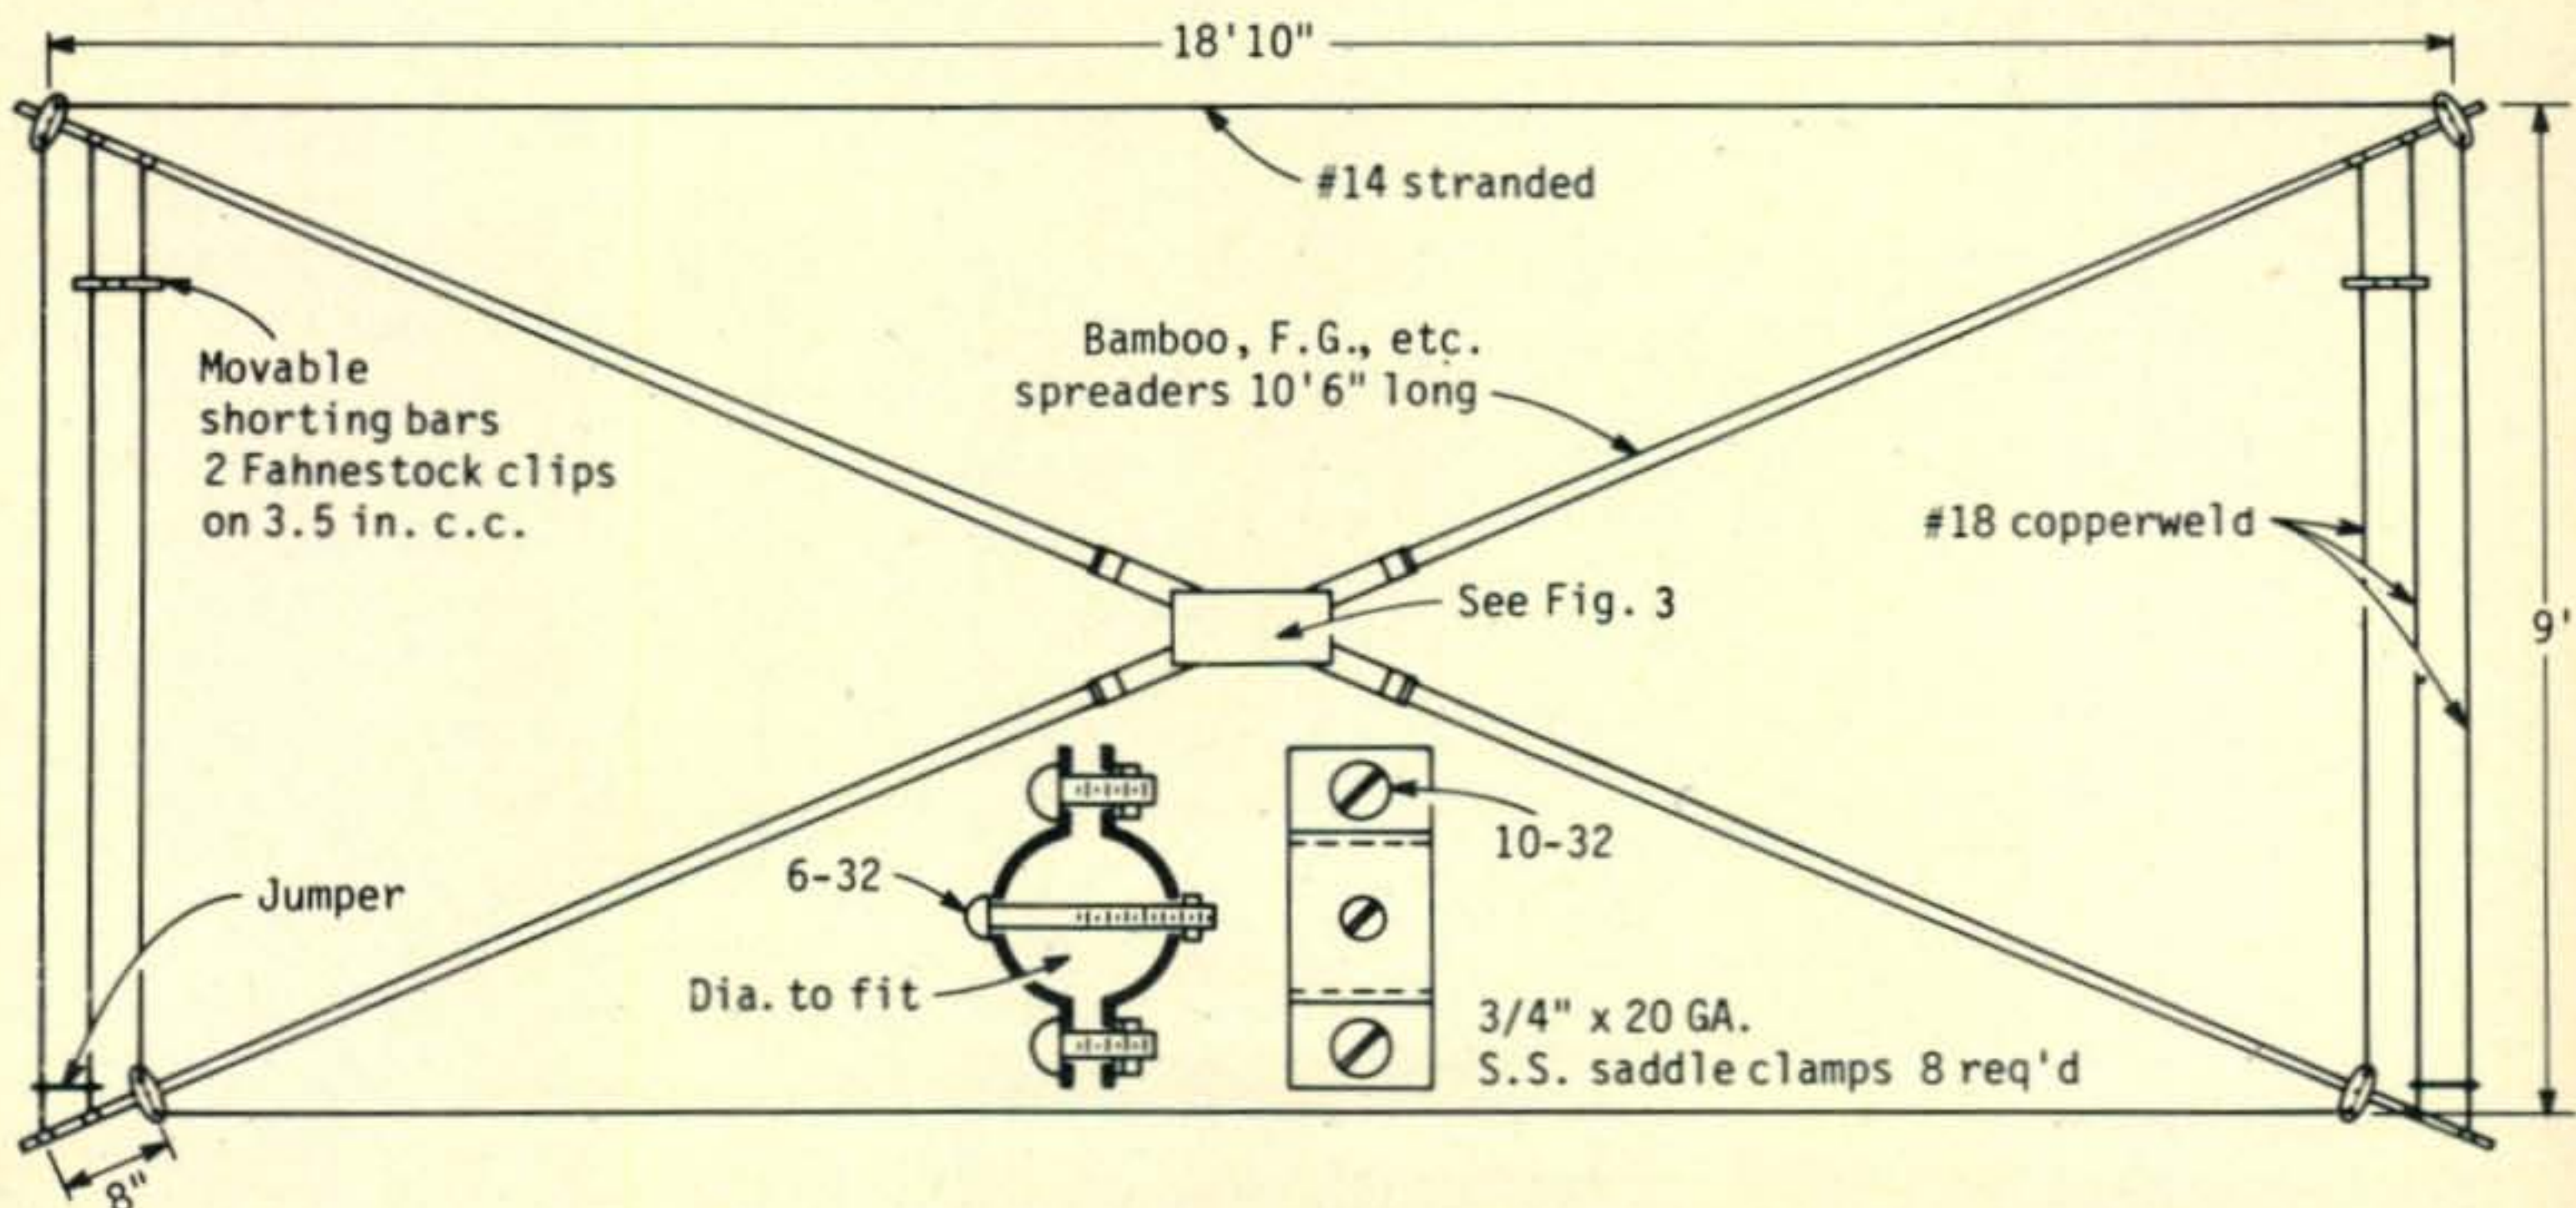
Construction of LP Quad reflector and saddle clamps.
